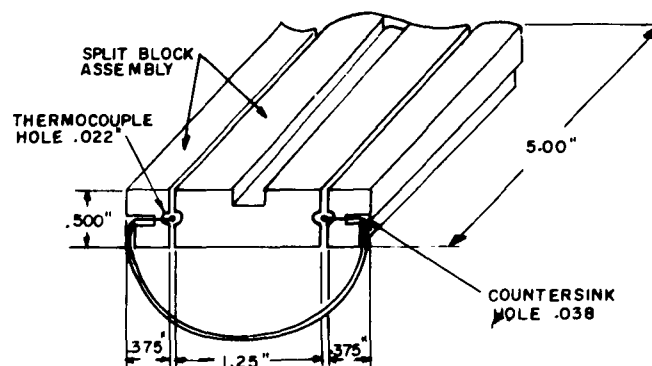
Hot and Cold Junction Assembly, 2-MM Calorimeter.
